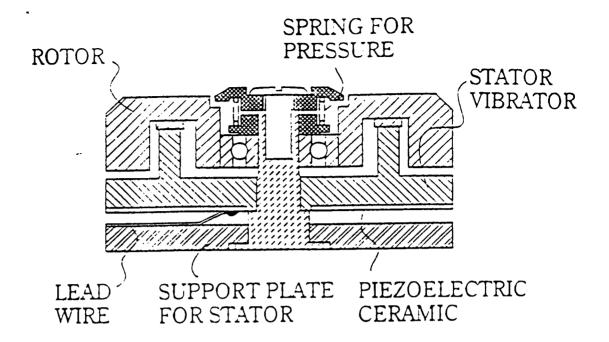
Construction of the motor shown in Fig. 6.6 (stator: B₀₃-mode disk; 2-phase driving).
